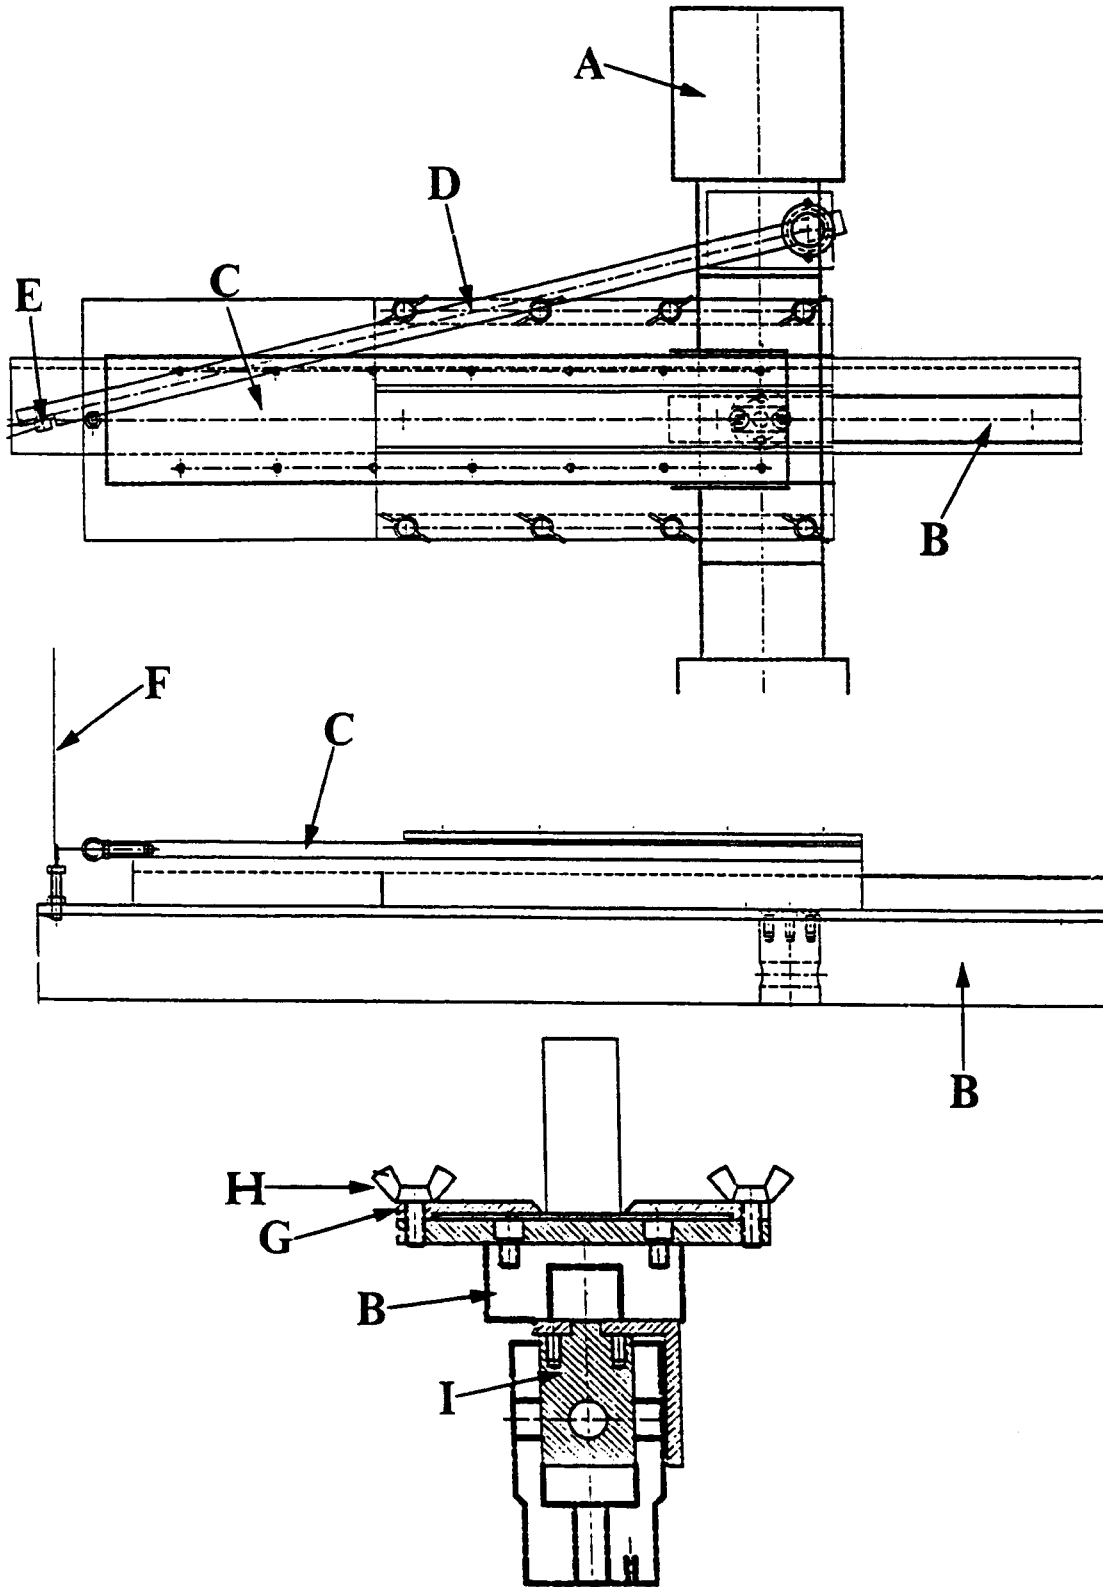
The geometry of the peeling accessory for the Instron UTM. Upper = top view; middle = side view; bottom = cross-section; A = UTM bridge; B = sliding rack; C = specimen base; D = lever; E = grip for wire; F = metal wire; G = clamp-plate; H = screw; I = fixture joint.
